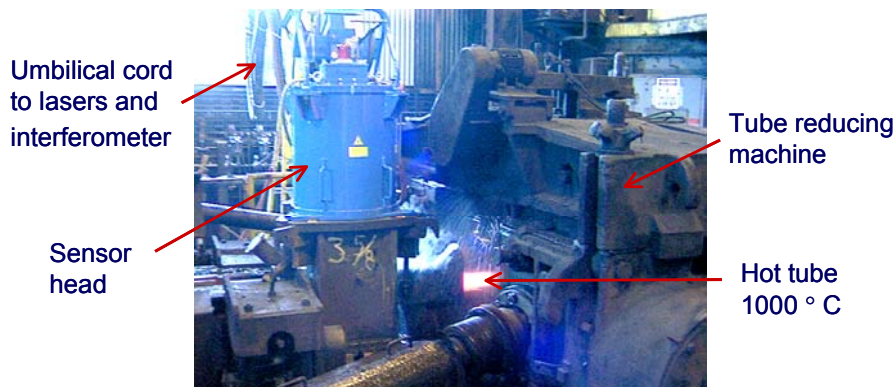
View of the inspection head of a laser-ultrasonic system installed on seamless tube fabrication line.
